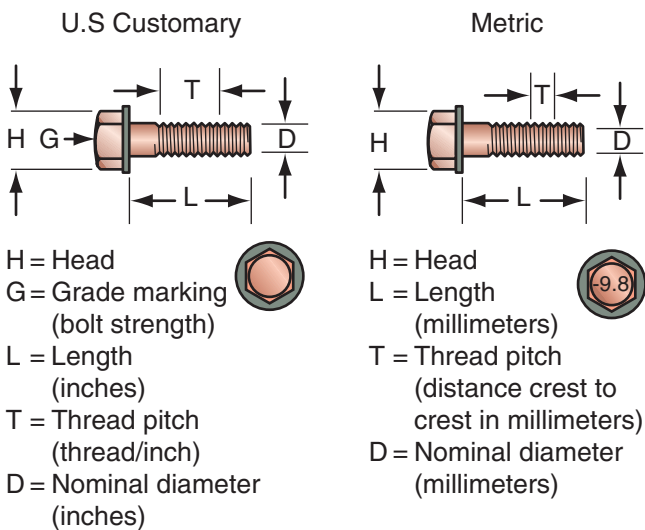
Critical bolt dimensions, in the United States Customary (USC) and metric systems.
